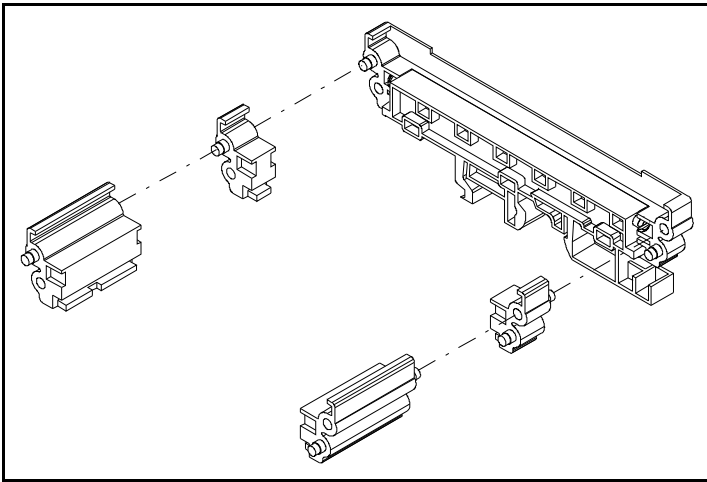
INSTALLATION OF THE RAIL PIECES
